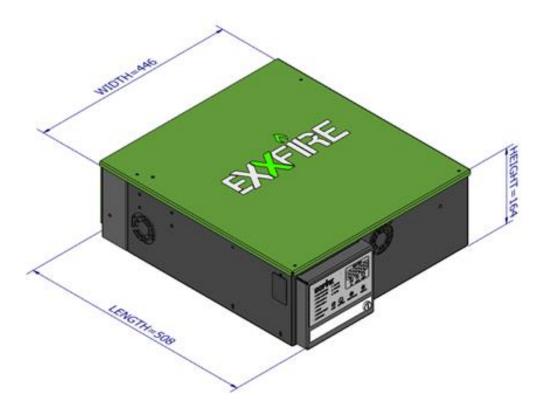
Product dimensions (EXX-1500CNF flex-User Interface mounted at front side)
